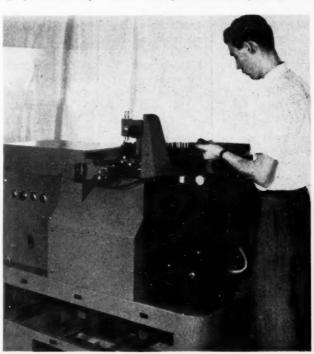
For efficiency, it may be best to feed parts to the gages by hand, as shown herewith.
